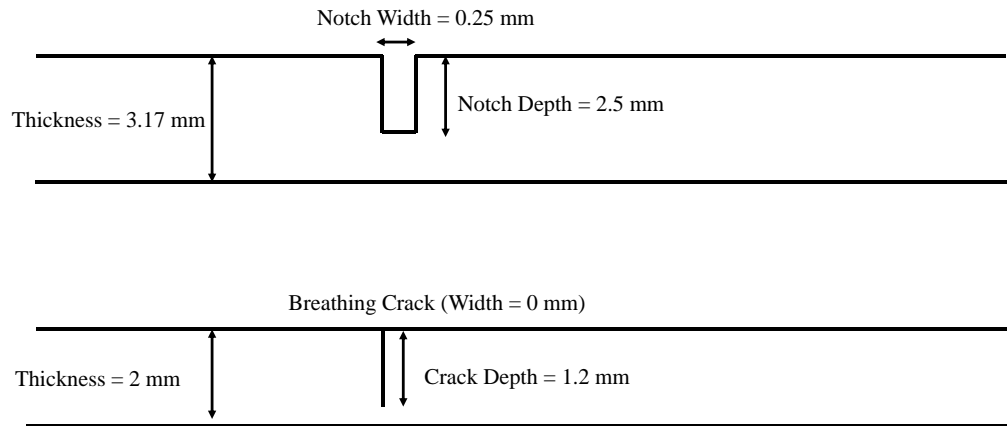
Damaged plates with notch (top) and breathing crack (bottom)
